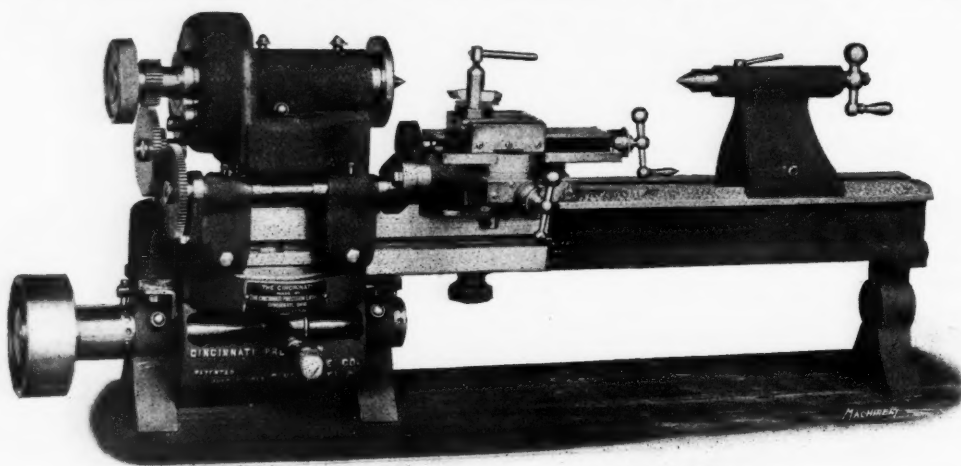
Cincinnati Friction-driven Precision Lathe with Slide-rest Screw-cutting Attachment
